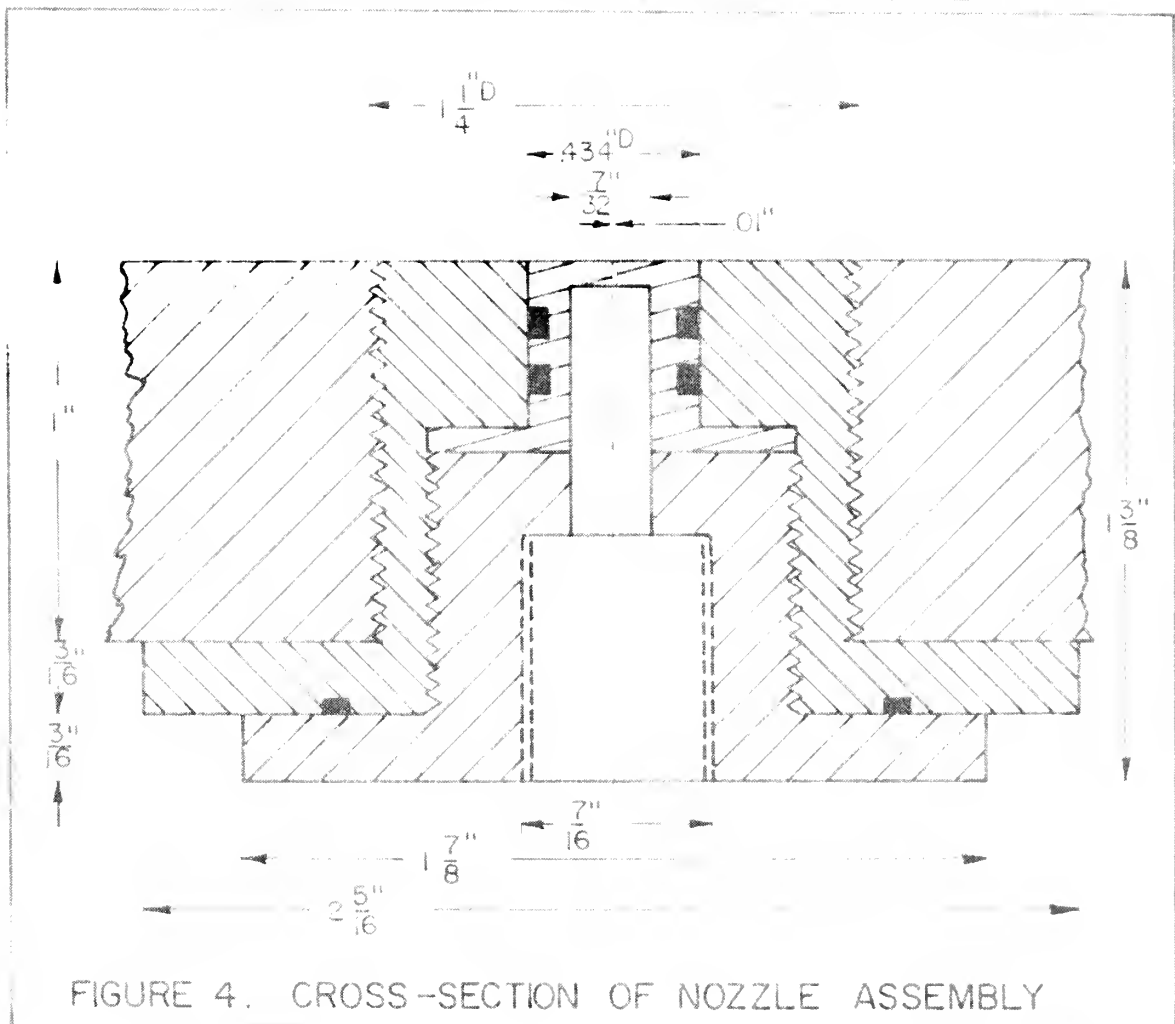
CROSS-SECTION OF NOZZLE ASSEMBLY
